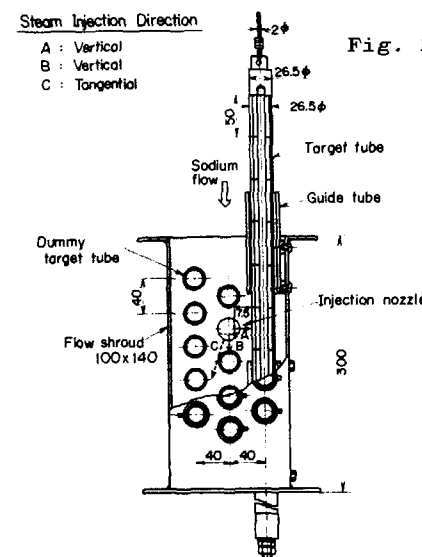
CROSS-SECTION OF TARGET TUBE ASSEMBLY
